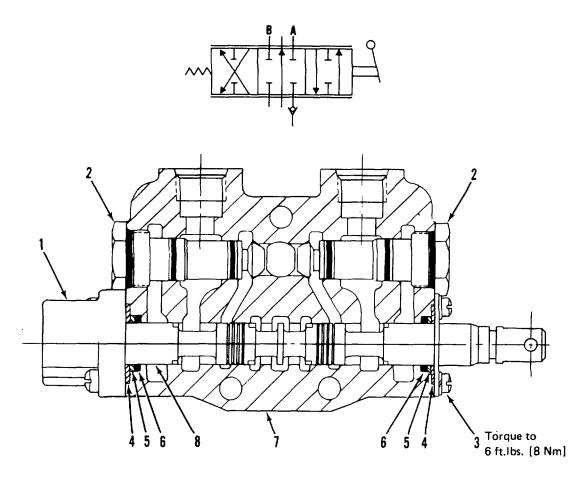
MODEL V20 DIRECTIONAL CONTROL VALVE TYPICAL MAIN ASSEMBLY
